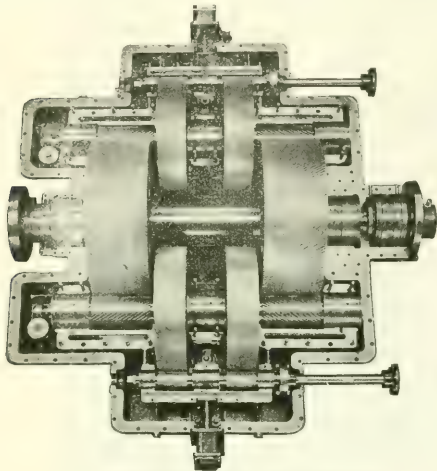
TWO PINION DOUBLE REDUCTION GEAR
